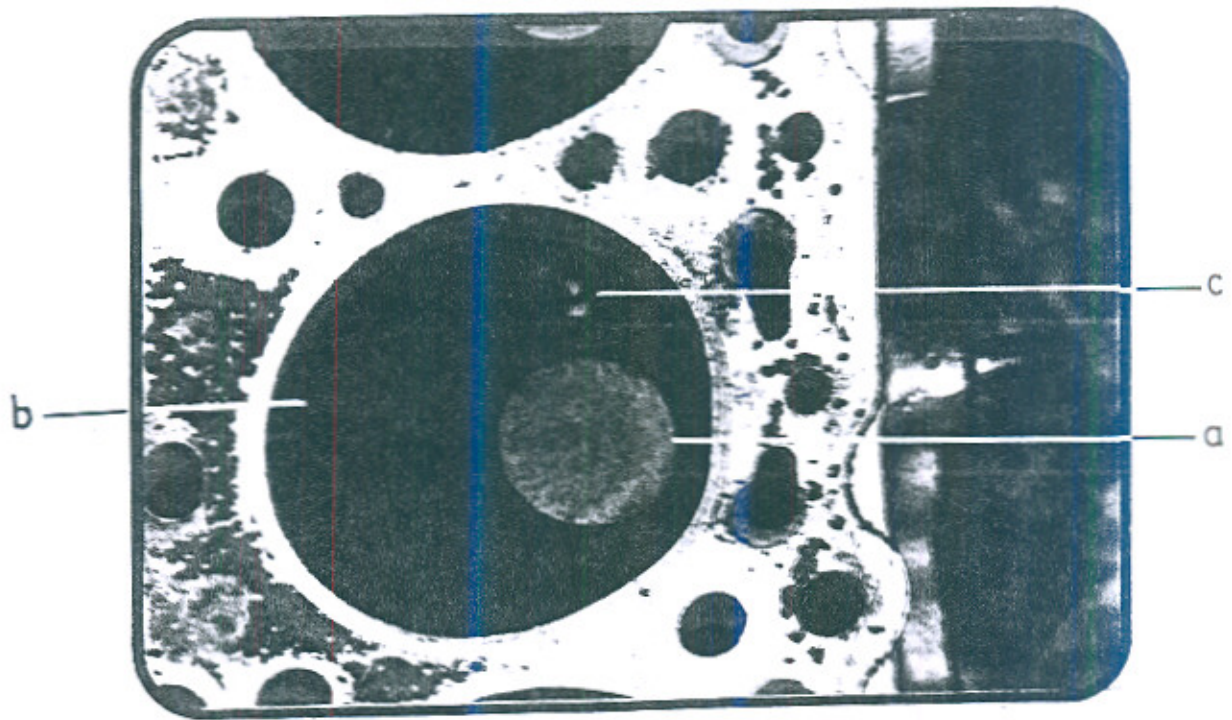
COMBUSTION CHAMBER CYLINDER No.2
